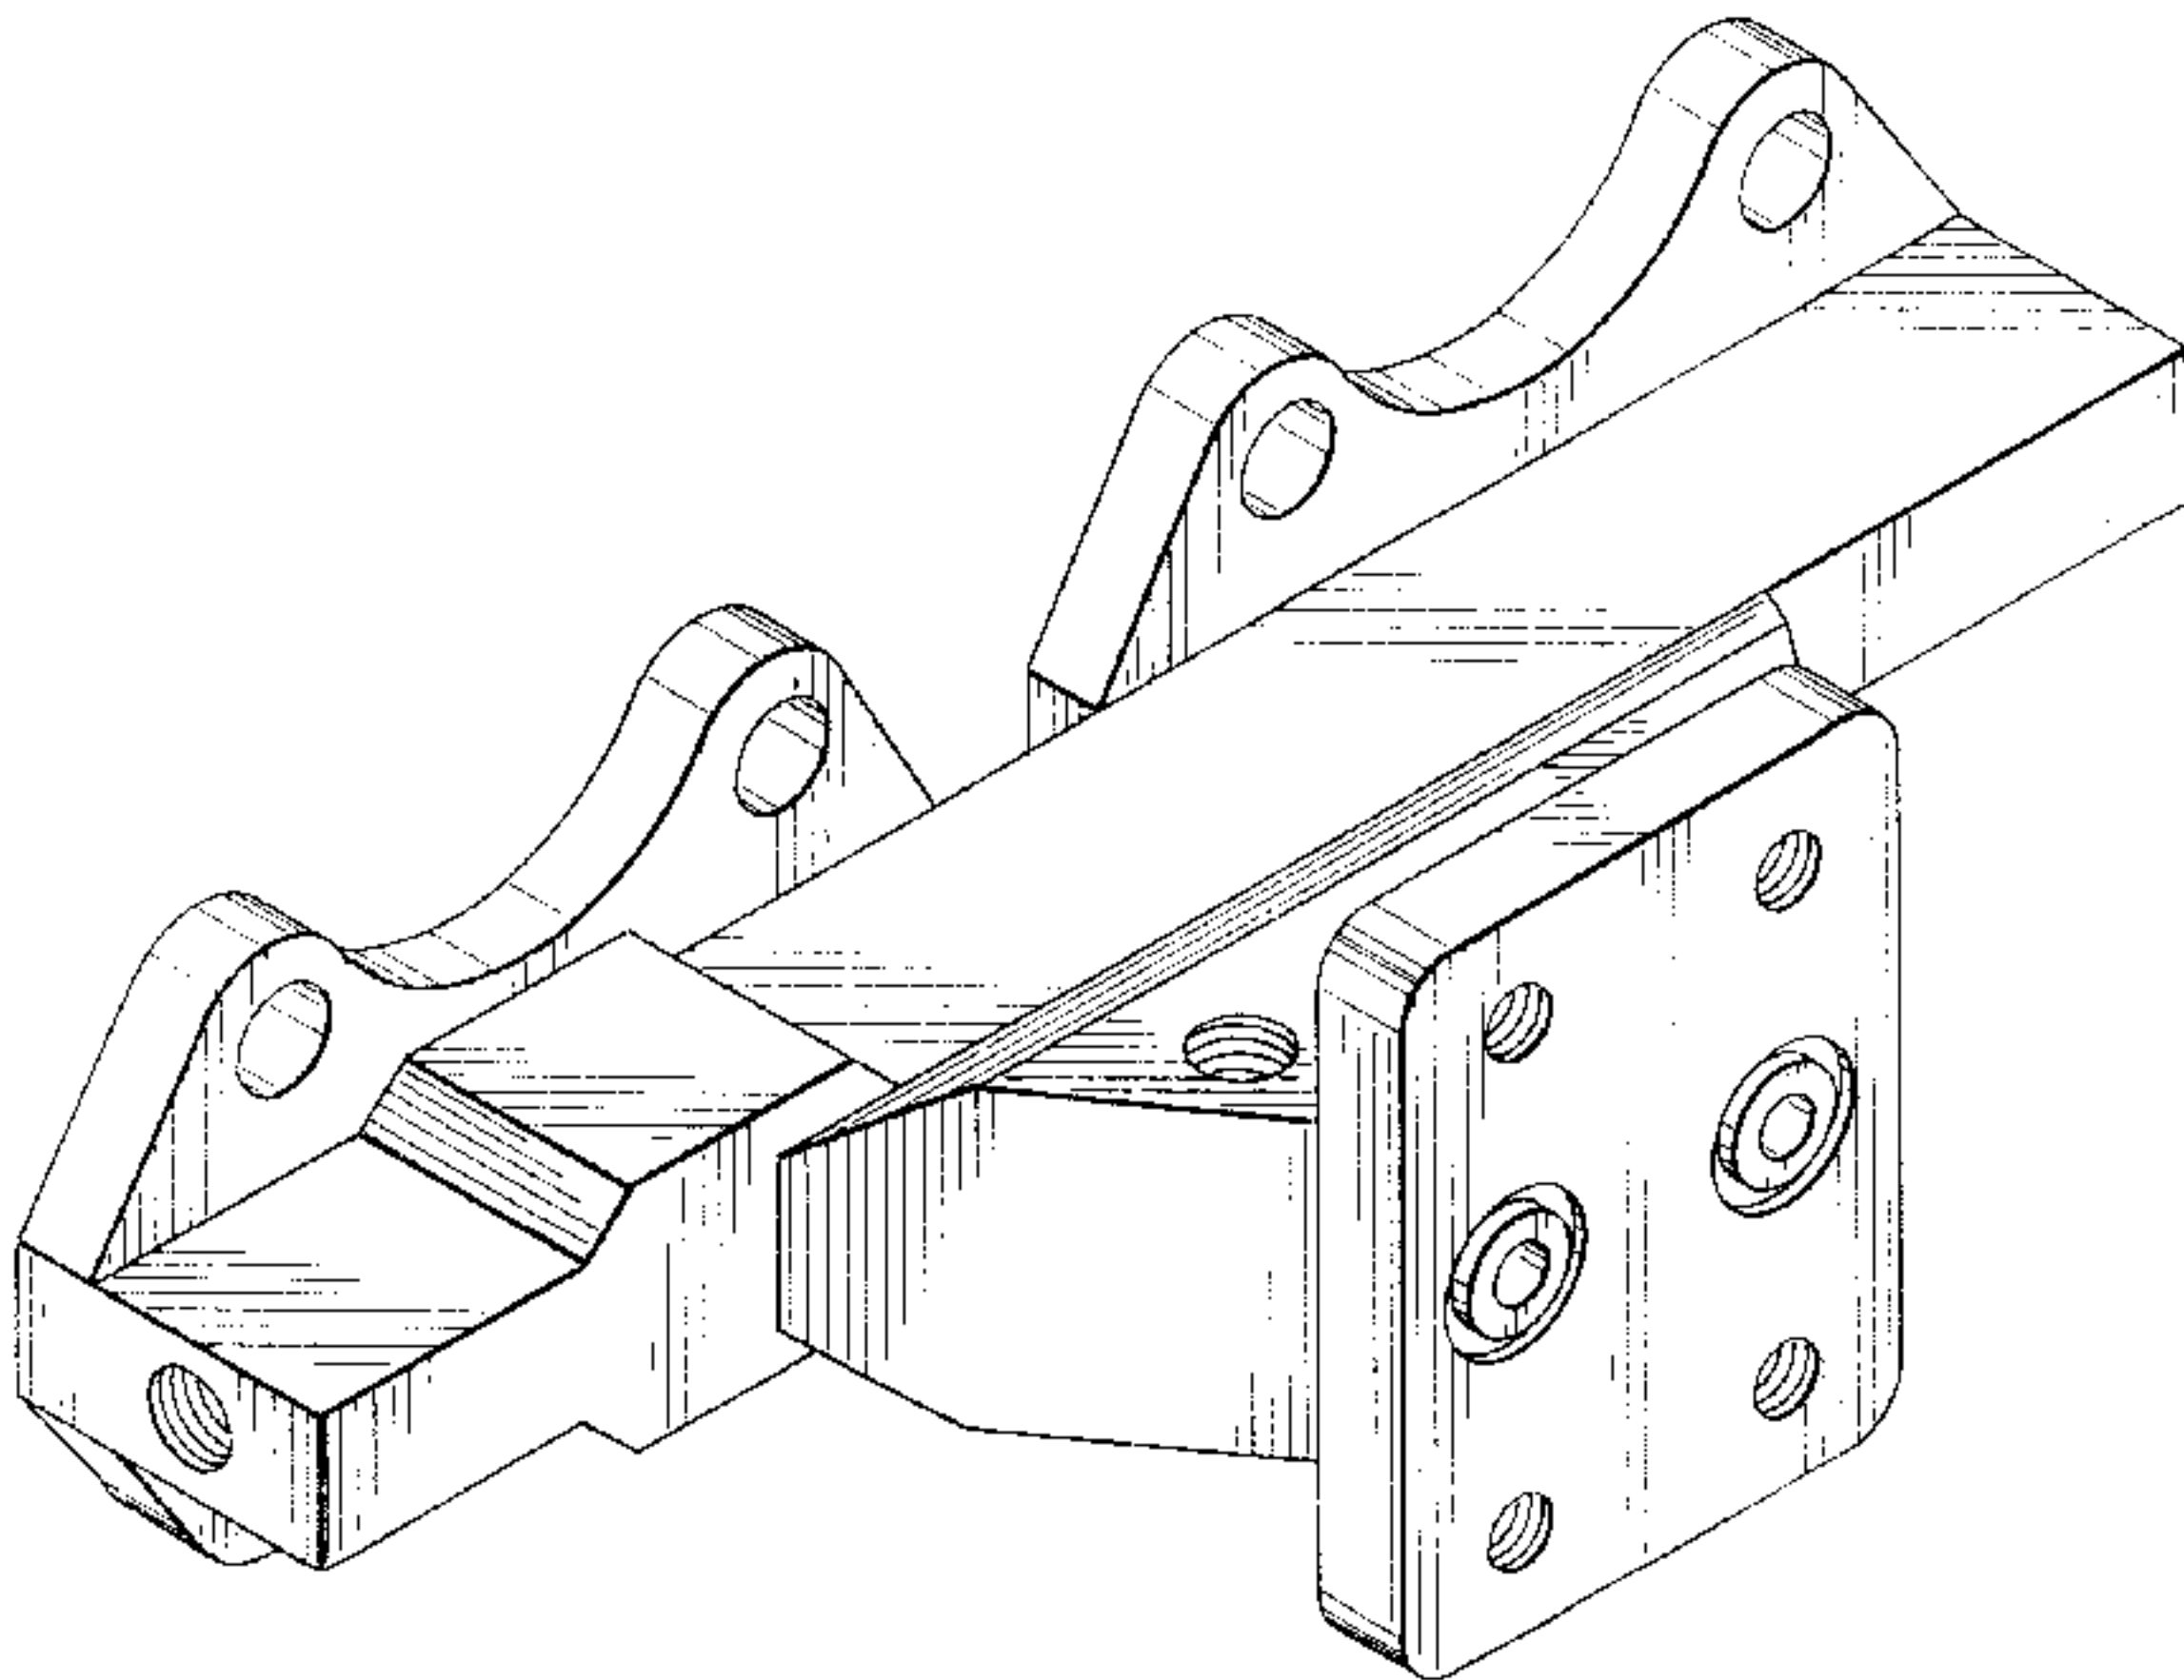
is a front pictorial view of an instrument manifold showing my new design;
